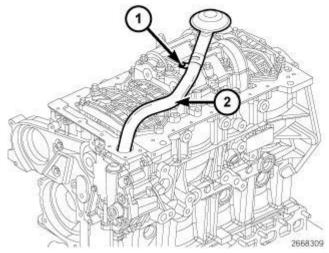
Oil Pump Pickup Tube & Bolt Courtesy of CHRYSLER LLC
